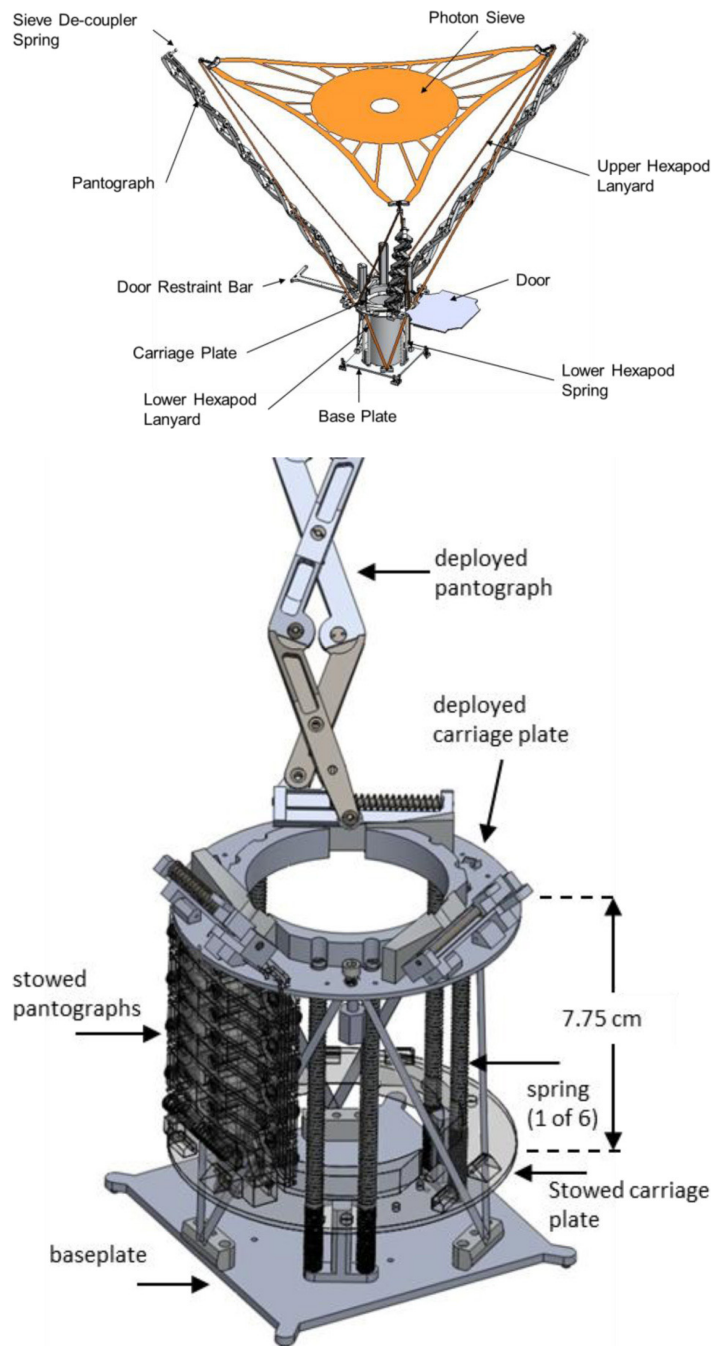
CAD drawing (top) showing Peregrine’s double hexapod structure. Superimposed CAD drawing (bottom) showing the stowed configuration (transparent) and deployed (solid) configuration, of the carriage plate and pantographs. (Some parts have been omitted for clarity.)
